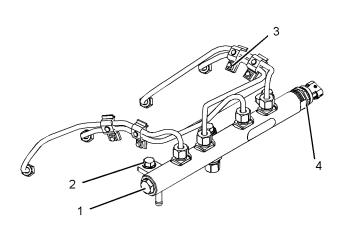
g02621238 Typical example (1) Tighten the fuel pressure relief valve to the following torque......100 N·m (74 lb ft) (2) Tighten the bolts to the following torque.....25 N·m (18 lb ft) (3) Tighten the bolts to the following torque.....10 N·m
